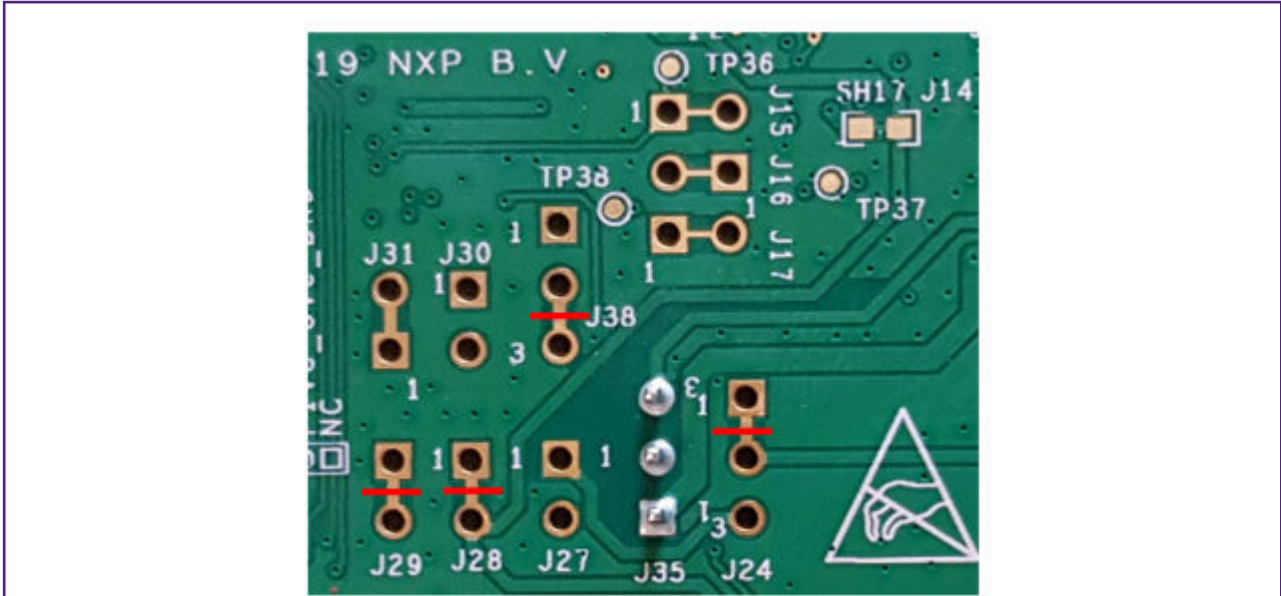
Cut traces to the bottom side of the FRDM-KW38 board, rev. B
